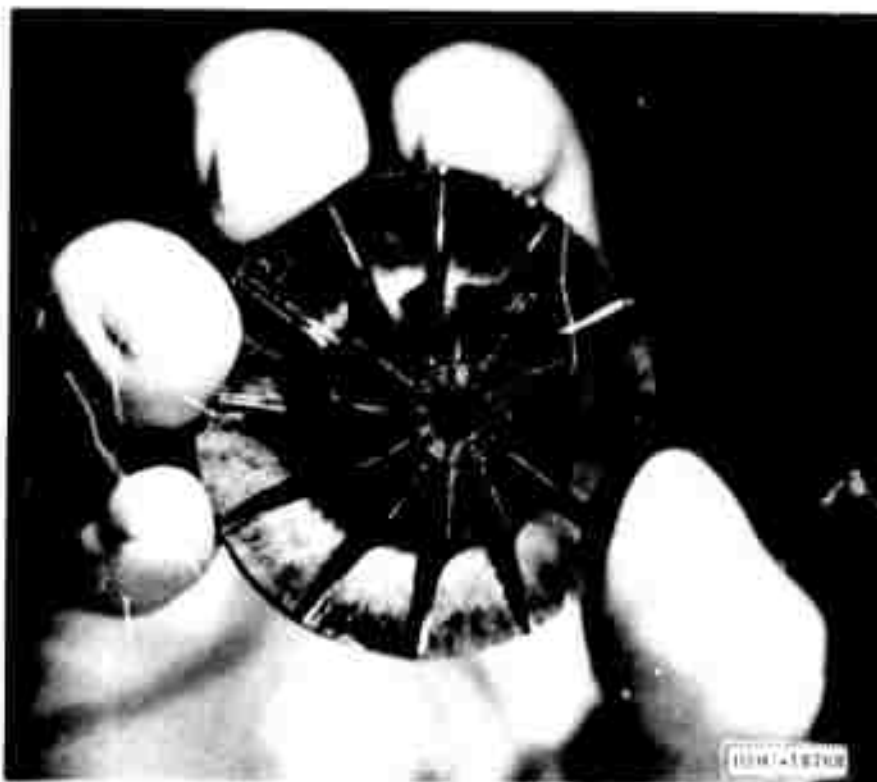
Turbine Wheel (1.90-Inch-Diameter) with 12 Blades
